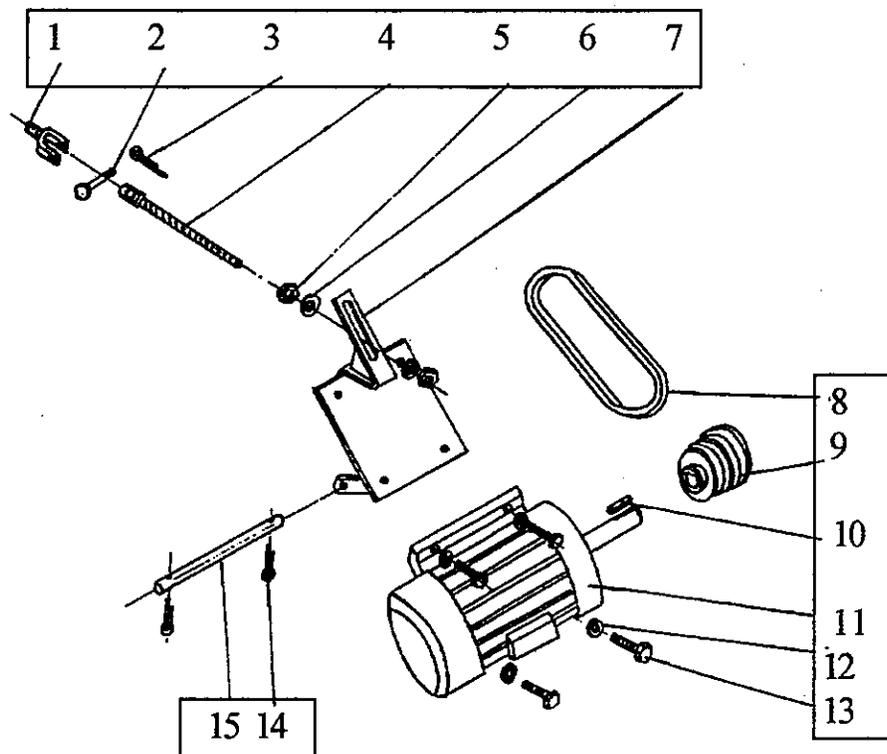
LEAD SCREW SHIFTER MECHANISM
